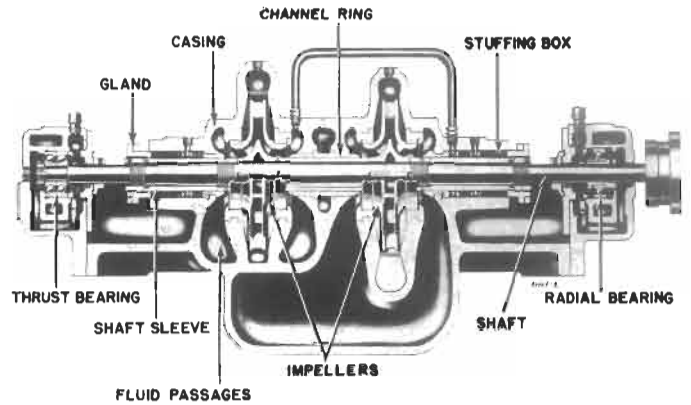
Cross-section horizontal two-stage horizontal split case centrifugal pump. (Courtesy Ingersoll-Rand Co.)
